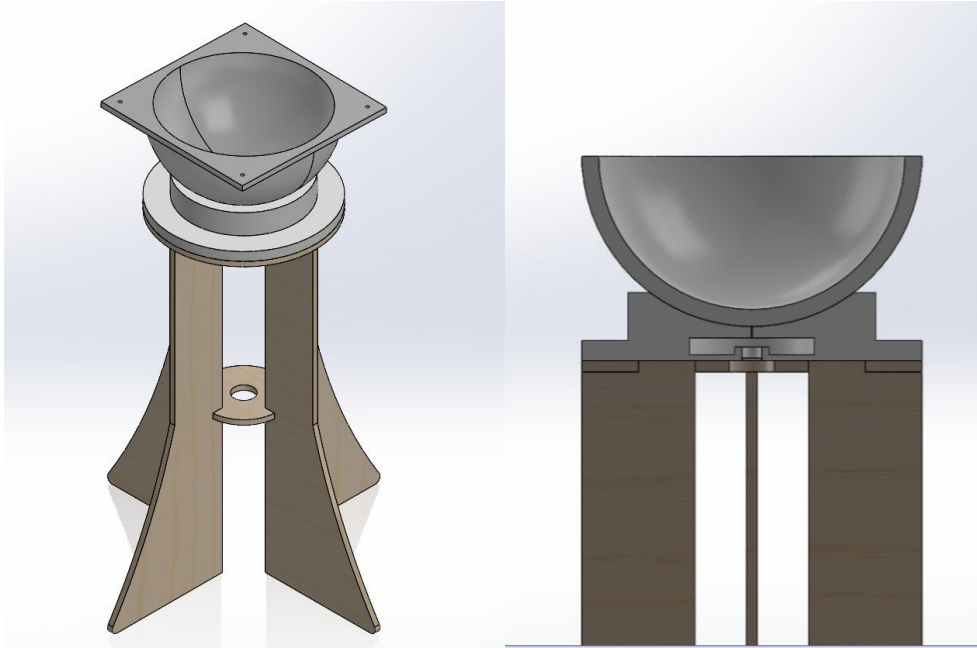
Spherical air bearing 3D CAD model on SOLIDWORKS, showing the isometric view and the sectional front view to illustrate the air chamber and the central orifice.
